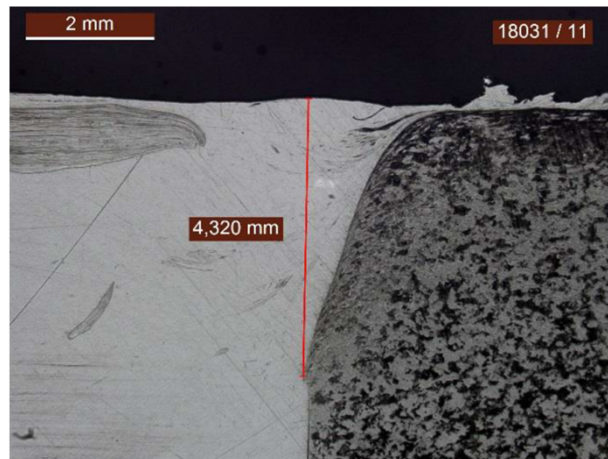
Cross section of the FSW weld. The right hand side is the strong alloy. The red line indicates the full penetration depth of the weld.
